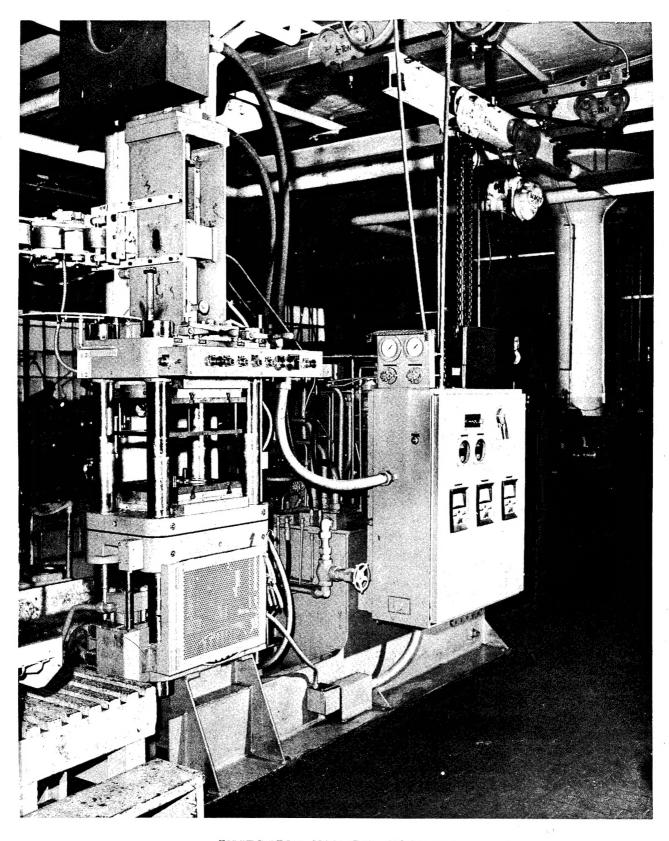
INJECTION MOLDING MACHINE 100 TON, VERTICAL RAM TYPE
